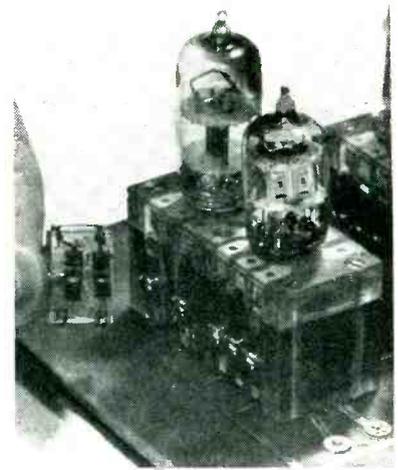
Cellular technique for mechanized wiring employs three-terminal molded cells that fit into two-tube building block. Printed wiring is used on base plate. Extensions of tube-socket springs make contact and hold blocks in place
